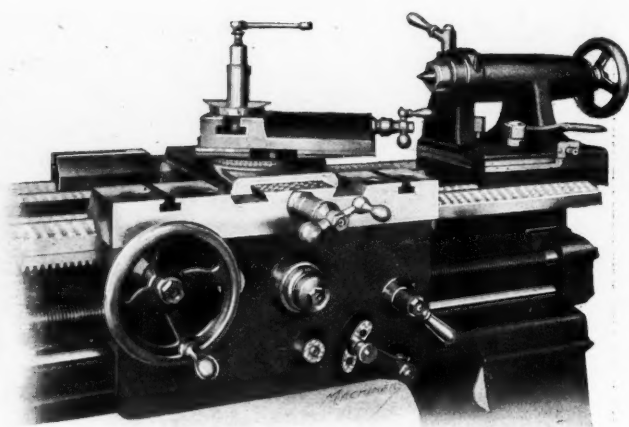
Tailstock End of "Roulsted" Engine Lathe
